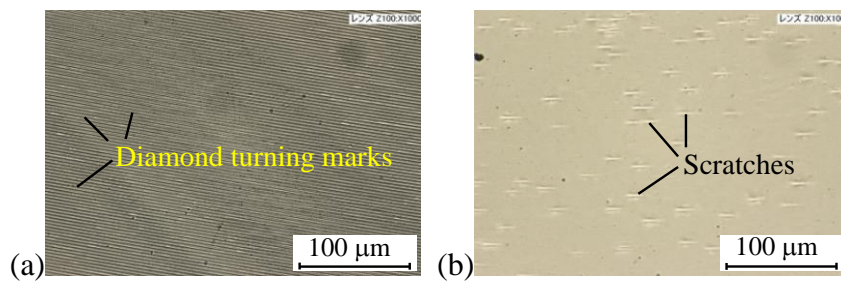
Surface textures of workpiece after (a) SCDT and (b) spot polishing for 75min
